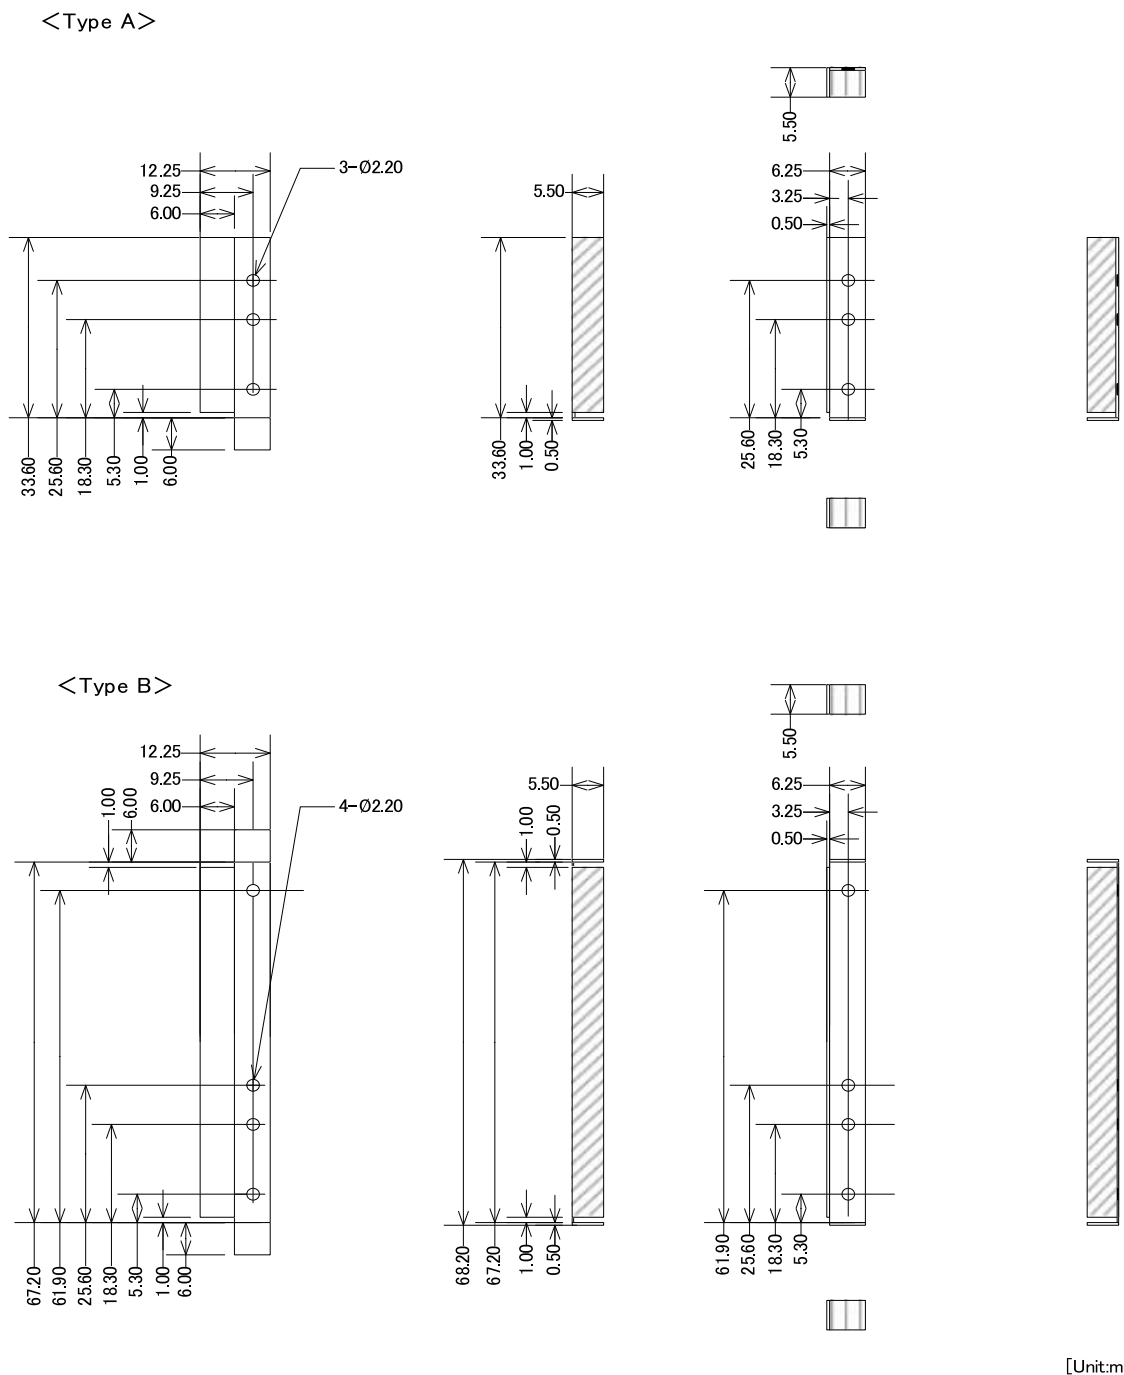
LCD Metal Fittings Reference Dimensions for LCD Expansion Board (Product Revision B)
